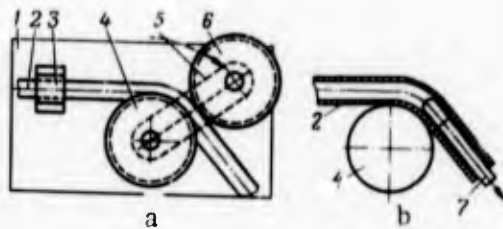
Diagram of Bending of Pipe Using Pipe Bender (a) and Mandrel (b): 1, base; 2, pipe; 3, clamp; 4, roller; 5, guide; 6, roller; 7, mandrel.
